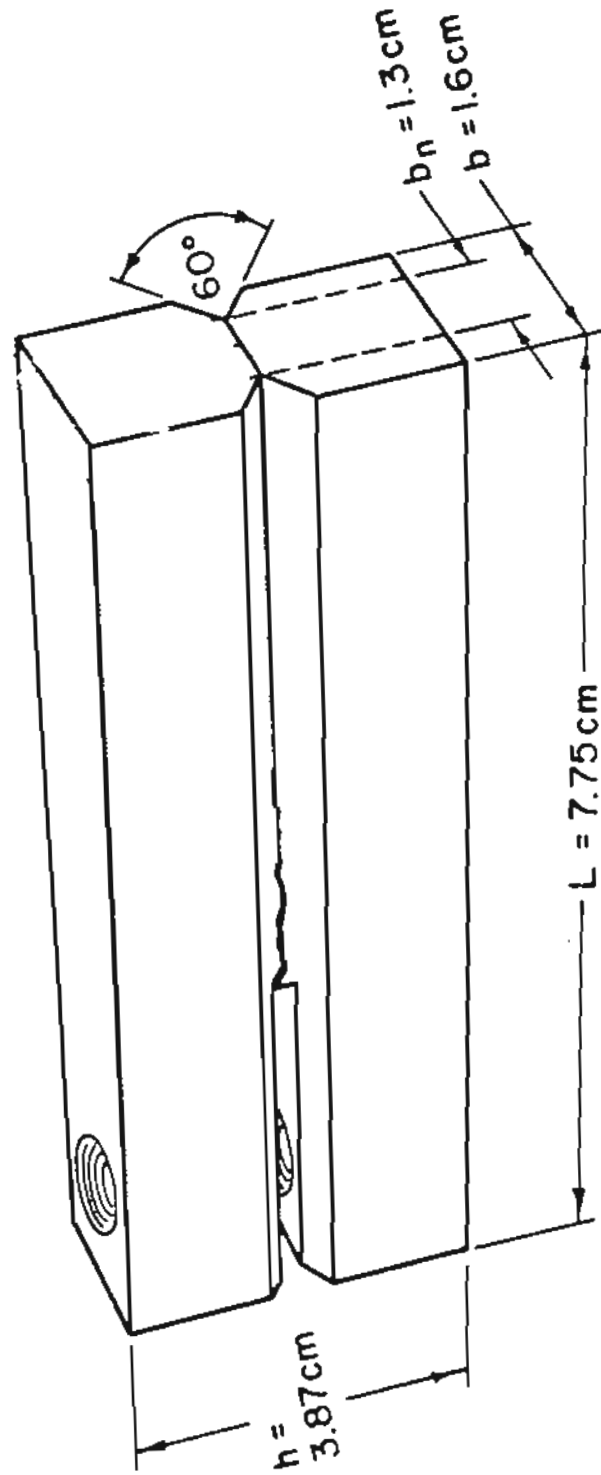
Double cantilever beam specimen used for obtaining threshold stress intensity for hydrogen assisted cracking.
